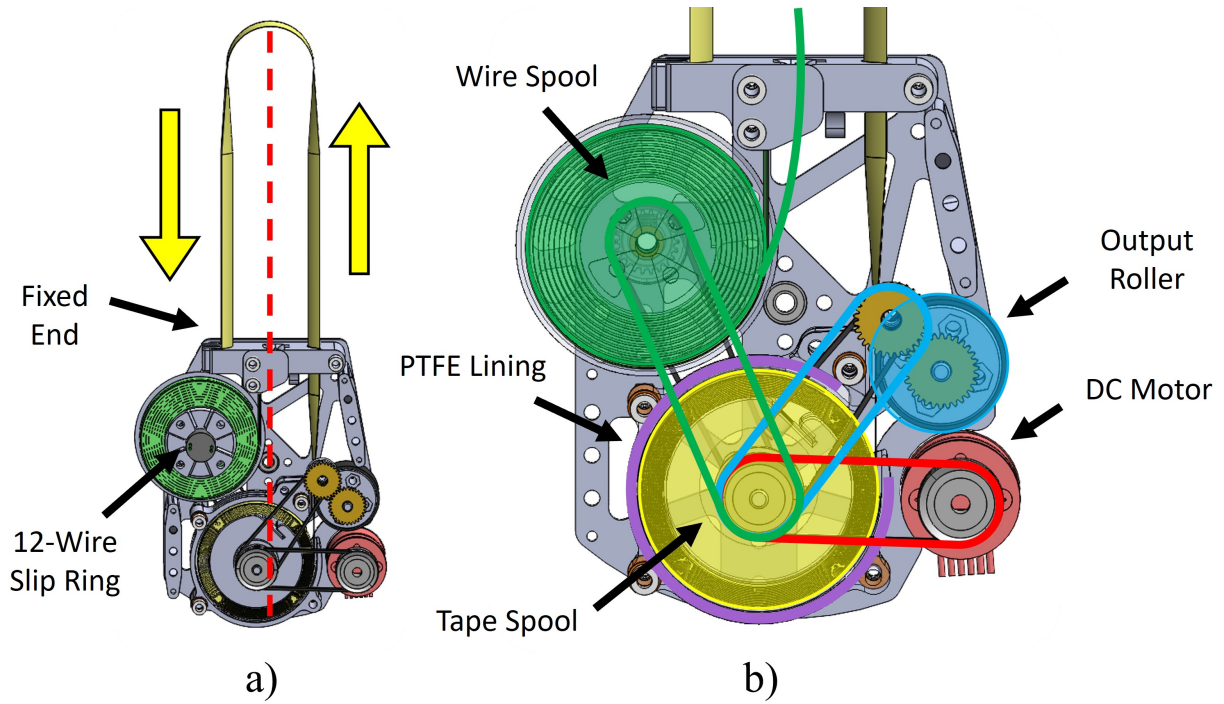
CAD of inside the limb module. a) Overall view showing the U-shaped tape, with one end fixed and the other fed to the spool. b) Closer view showing the belts that transmit power from the motor to the tape spool, then the output roller and the wire spool.
